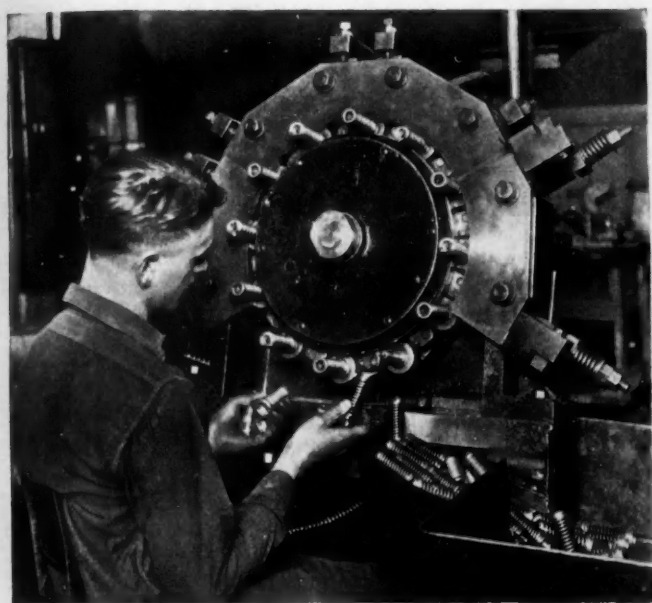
ROLL-SWAGING FITTINGS ON DUAL VALVE-SPRINGS
